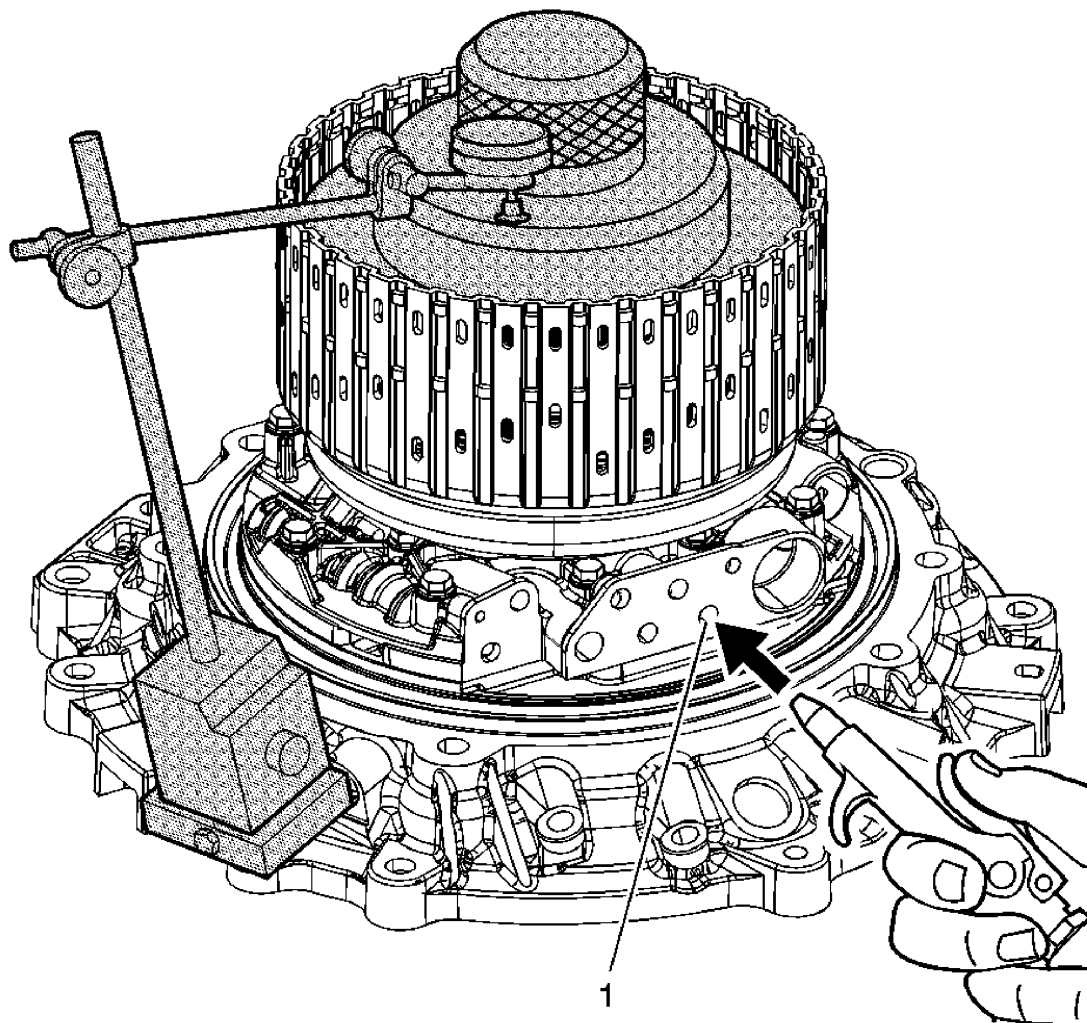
View Of Control Valve Body Gasket & Spacer Plate
